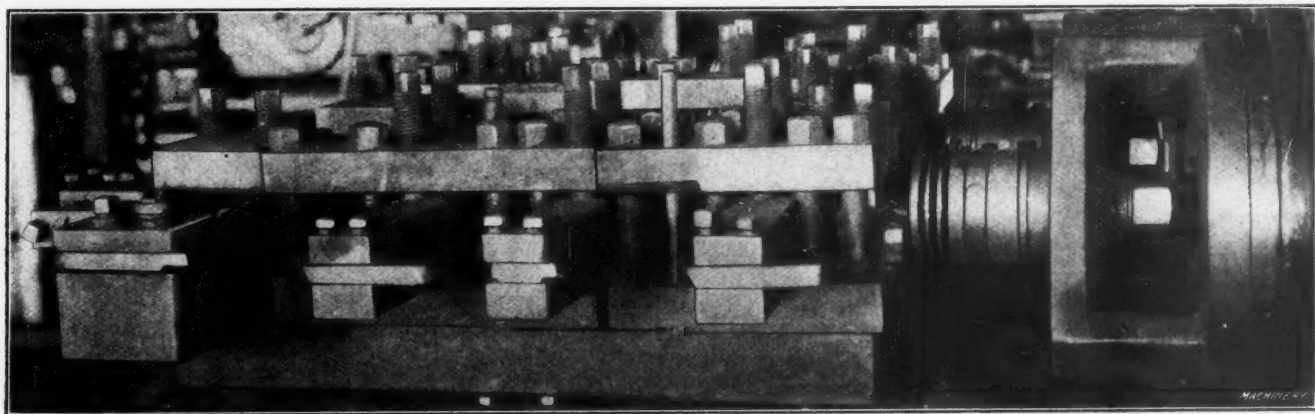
Tool Set-up used for machining Motor Cycle Pistons on a Double-spindle Flat Turret Lathe
